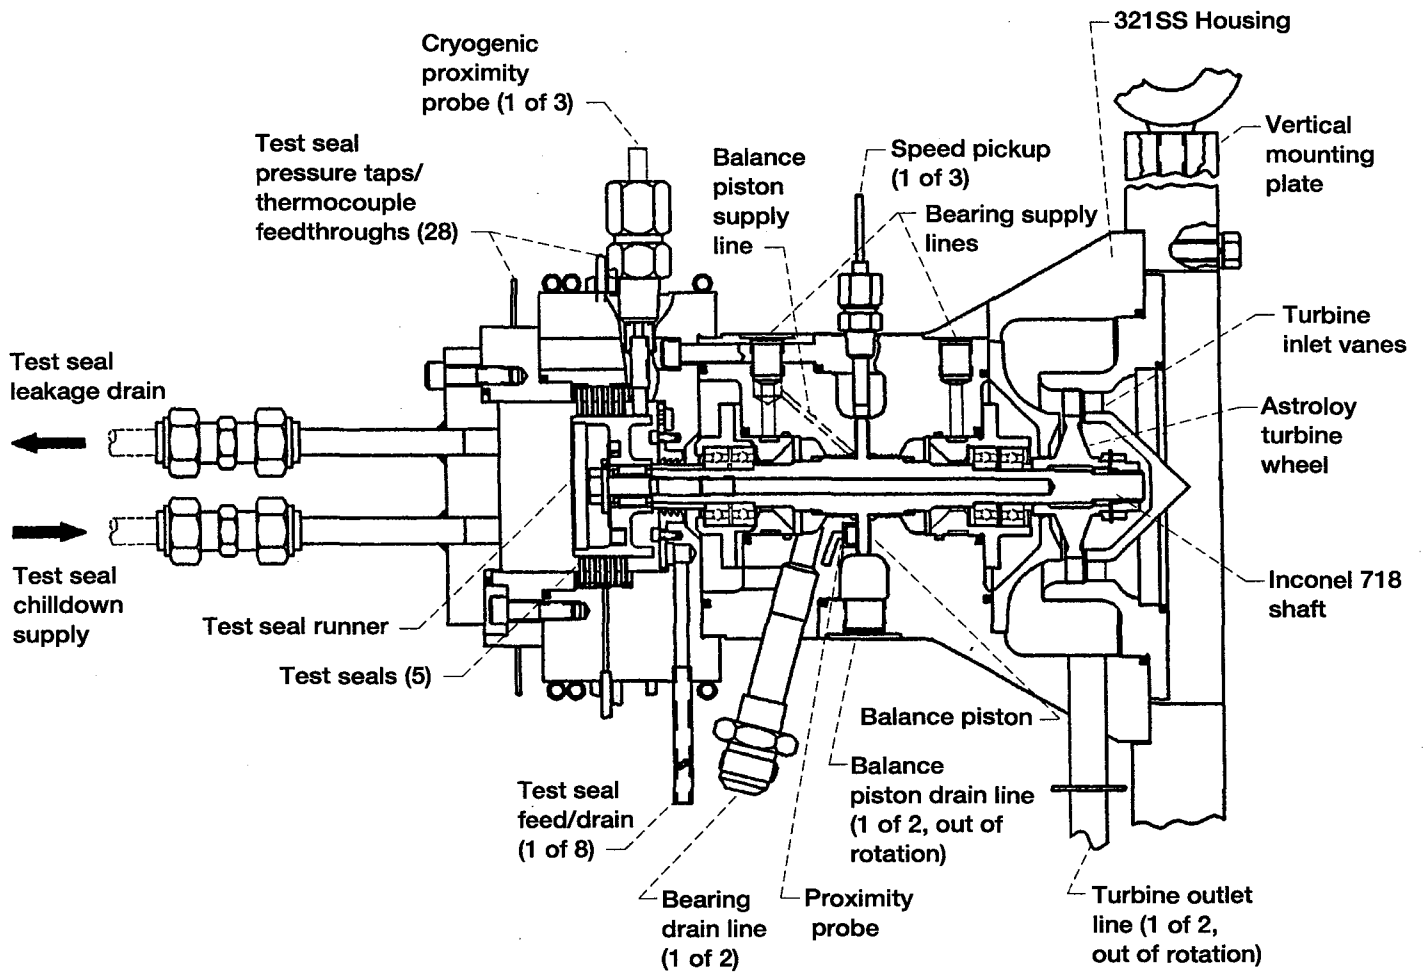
Cross section of Cryogenic Brush Seal Tester. (Some parts shown out of rotation for clarity.)
